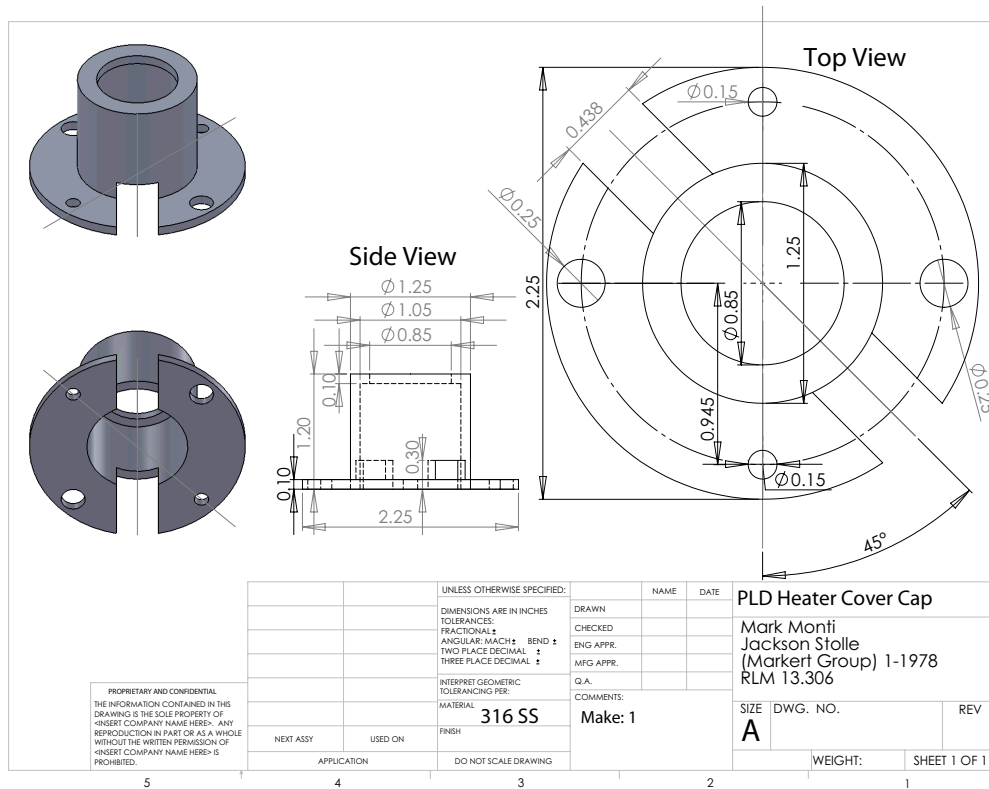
SolidWorks drawing of the stainless steel cover cap.
